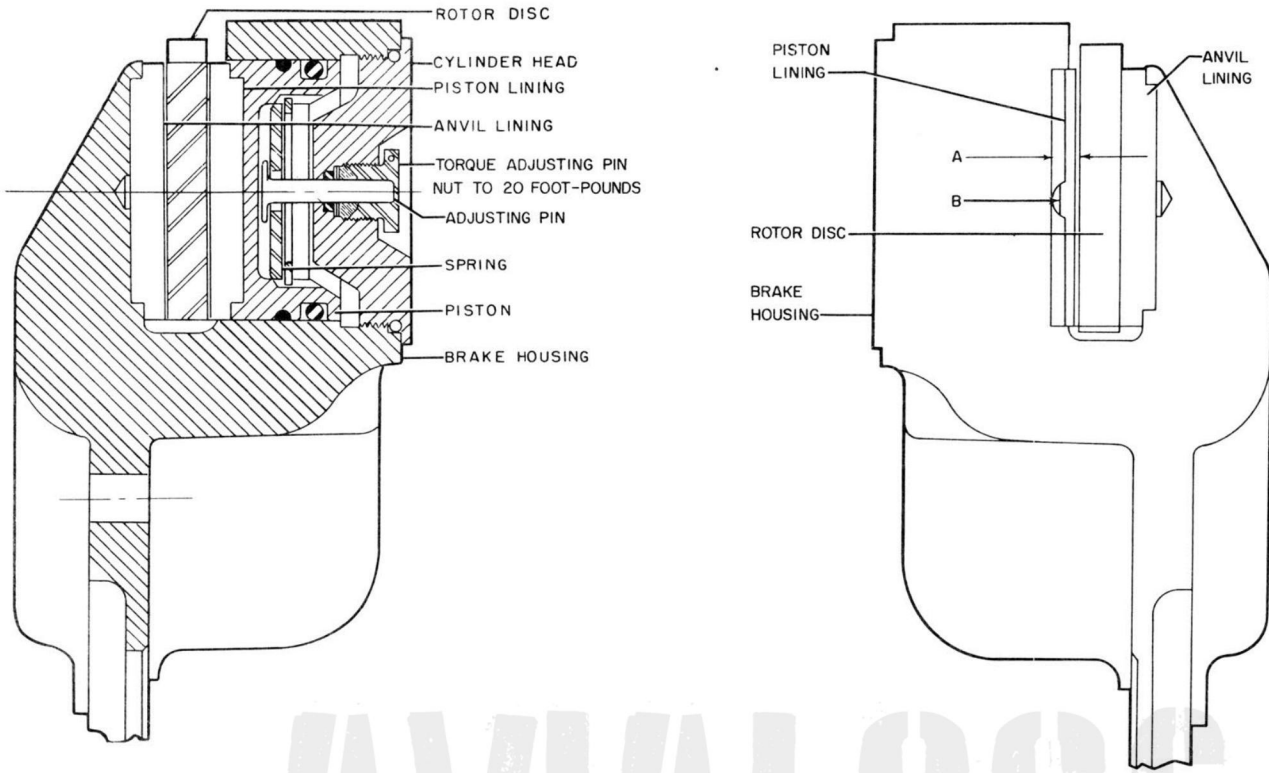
Main Landing Gear Wheel and Brake (Sheet 2)
